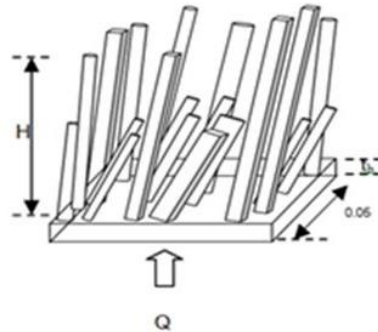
Side view of splayed multiple cross-sectional pin fin heat sinks
